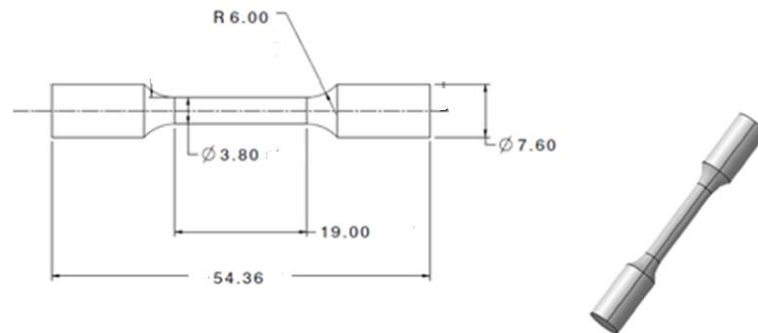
Dimension of the tensile test specimen per ASTM E8M
